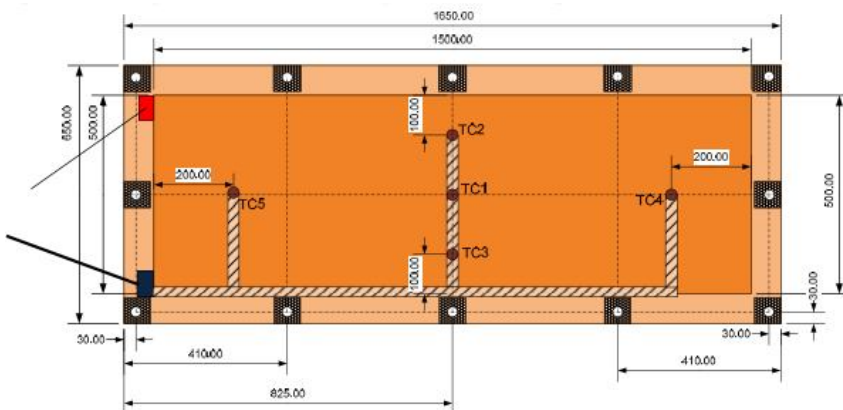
Conductive heating and vacuum blanket with dimensions and thermocouple positioning
